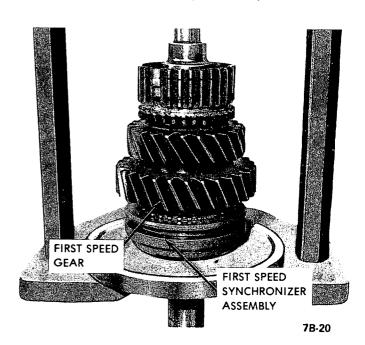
B-20 - Installing First Speed Gear and Synchronizer
